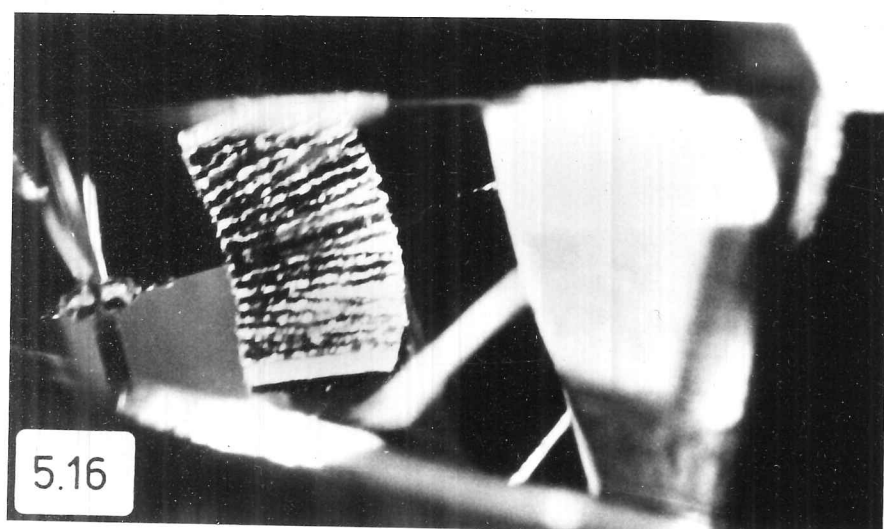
Transparent tool; magnesium machined in vacuum.
